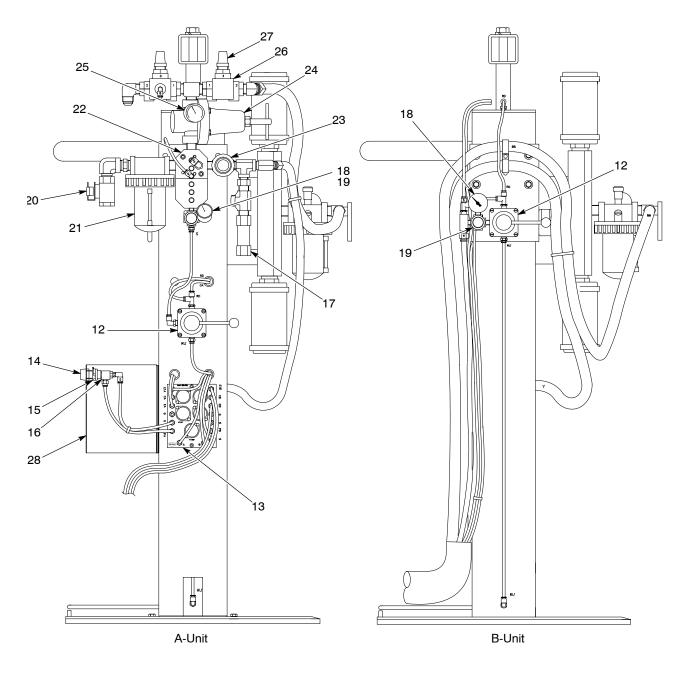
Rotary Elevator Control Pneumatic Components, Front View
